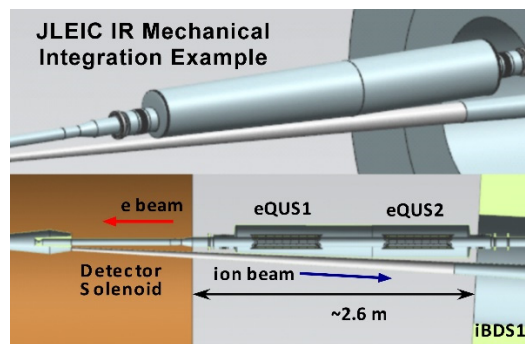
CAD examples of EIC MDI component mechanical integration showing coils, cryostats, bellows etc.
